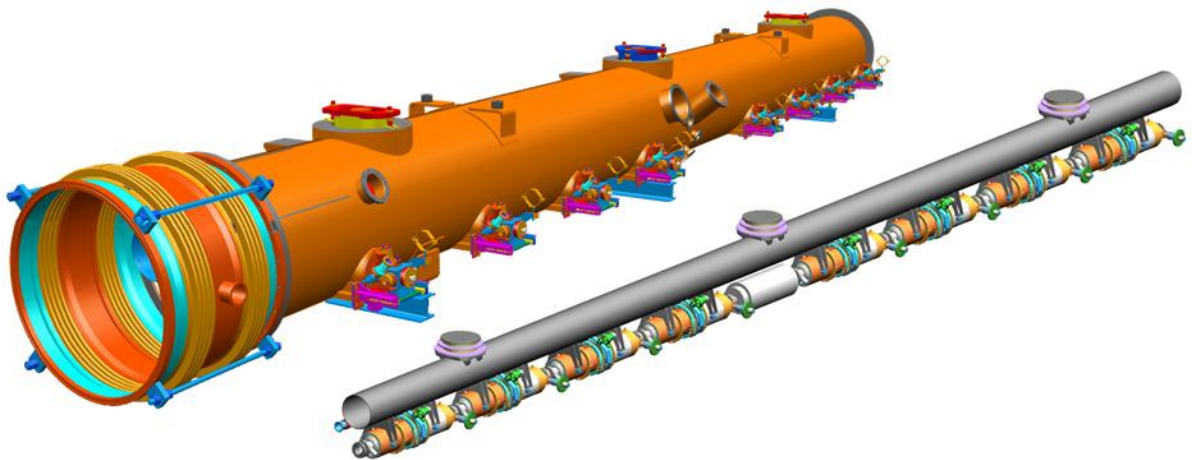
3C CAD view of an ILC cryomodule, both outer vacuum vessel (left) and inner cold mass string (right). Gas return pipe, 8 cavities and the central focusing quadrupole are visible in the latter.
